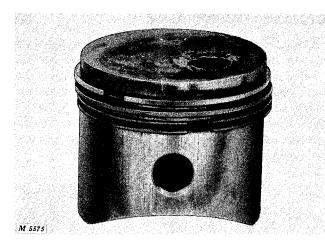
Hole Burned in Piston Caused by Pre-Ignition
